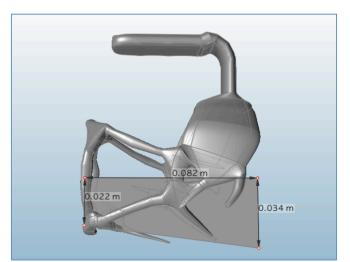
Revolve-cut sketch of the optimized Coffee cup holder design.
